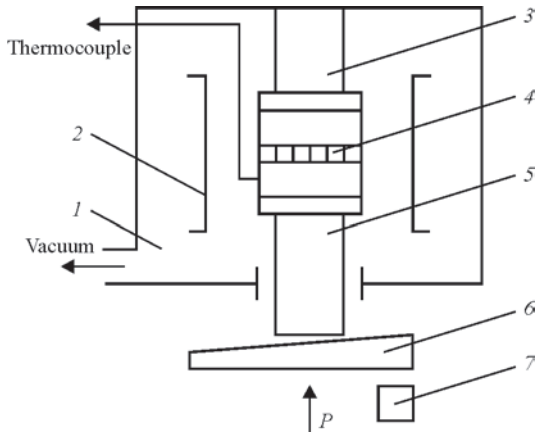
Schematic of working chamber with fixture: 1 — working chamber; 2 — molybdenum heater; 3 — upper rod; 4 — three-layer panel mounted in limiting sleeve; 5 — lower rod; 6 — wedge; 7 — press
